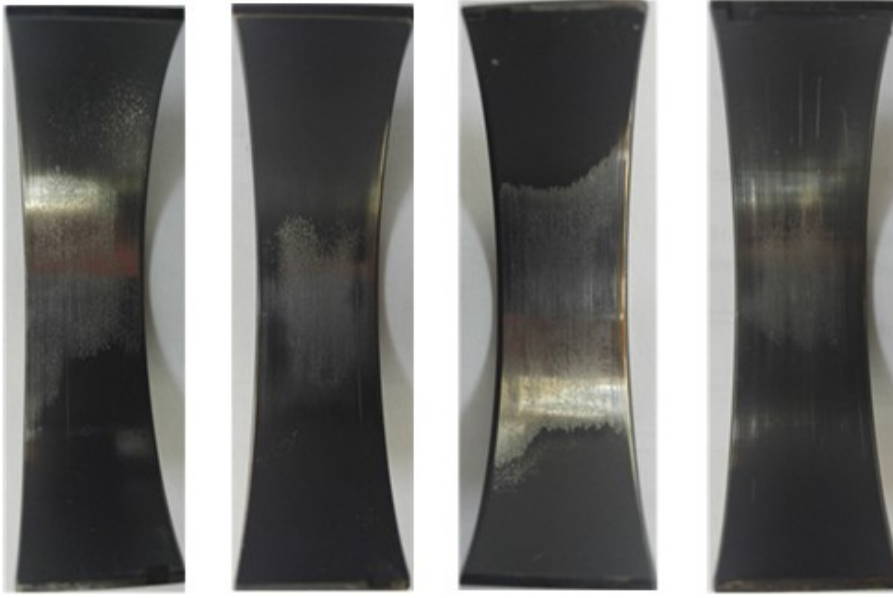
Tested Bearings Coated with K-340 Wear Resistant Coating
